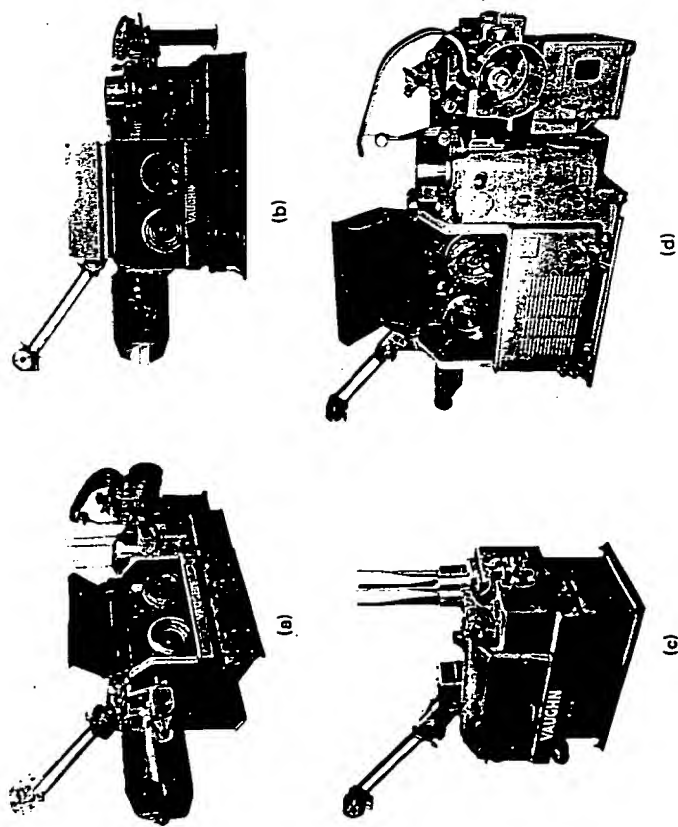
Wire drawing machines with various attachments: (a) 12-HIC with spooler; (b) 12-HIC with flattening attachment; (c) 12-HFH with vertical-spindle finishing block; (d) 12-HF with spooling attachment. (Courtesy Vaughn Machinery Co.)
